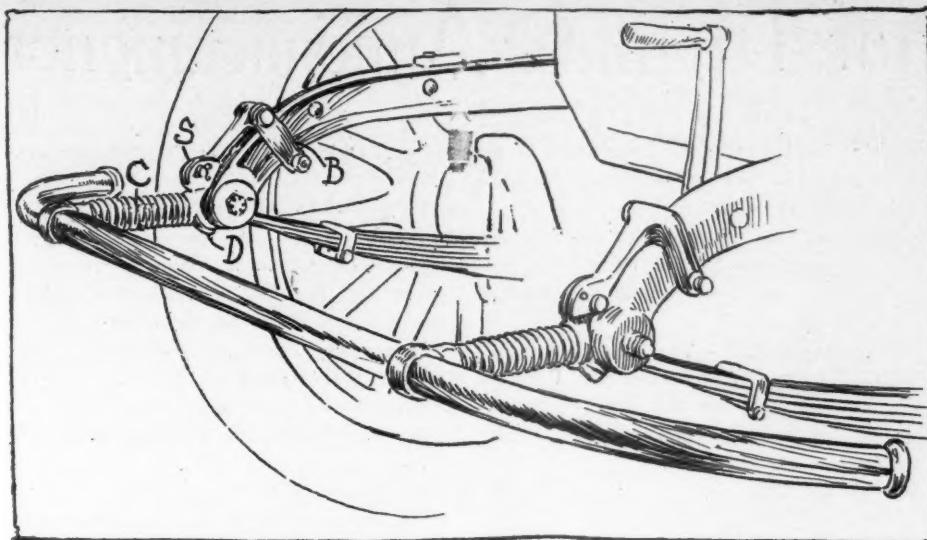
THE BUCKEYE LAMP BUMPER ATTACHED TO A MOTOR CAR
